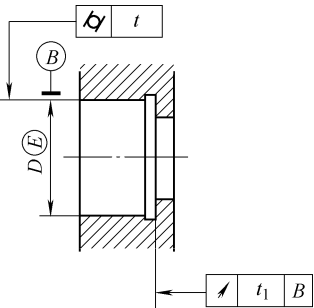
10 Marking method for geometric tolerance of housing bore
